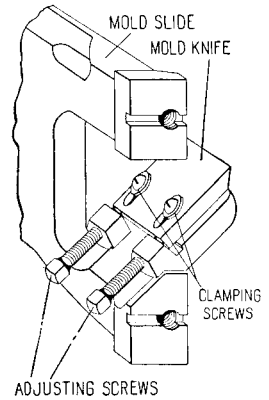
View of the back knife and the adjusting and clamping screw for bringing the edge of the knife in exact position against the mold disk, so that it will shave the back or bottom of the slug and at the same time will not cut the mold disk.
